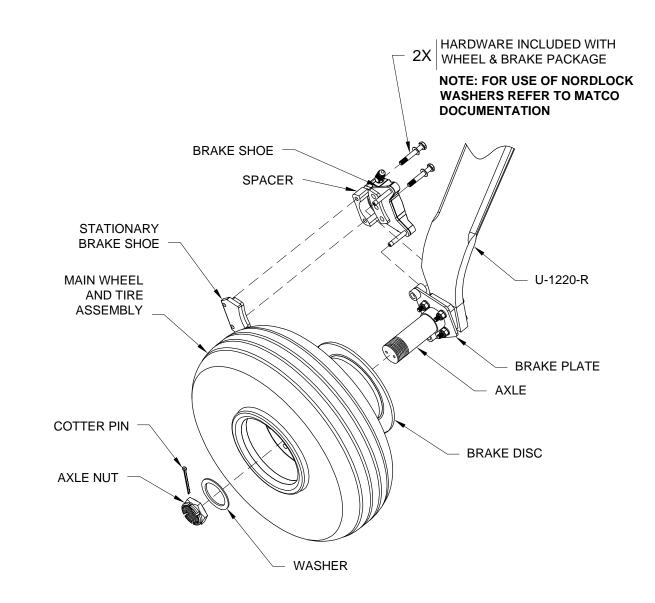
ATTACHING THE WHEELS AND BRAKES
